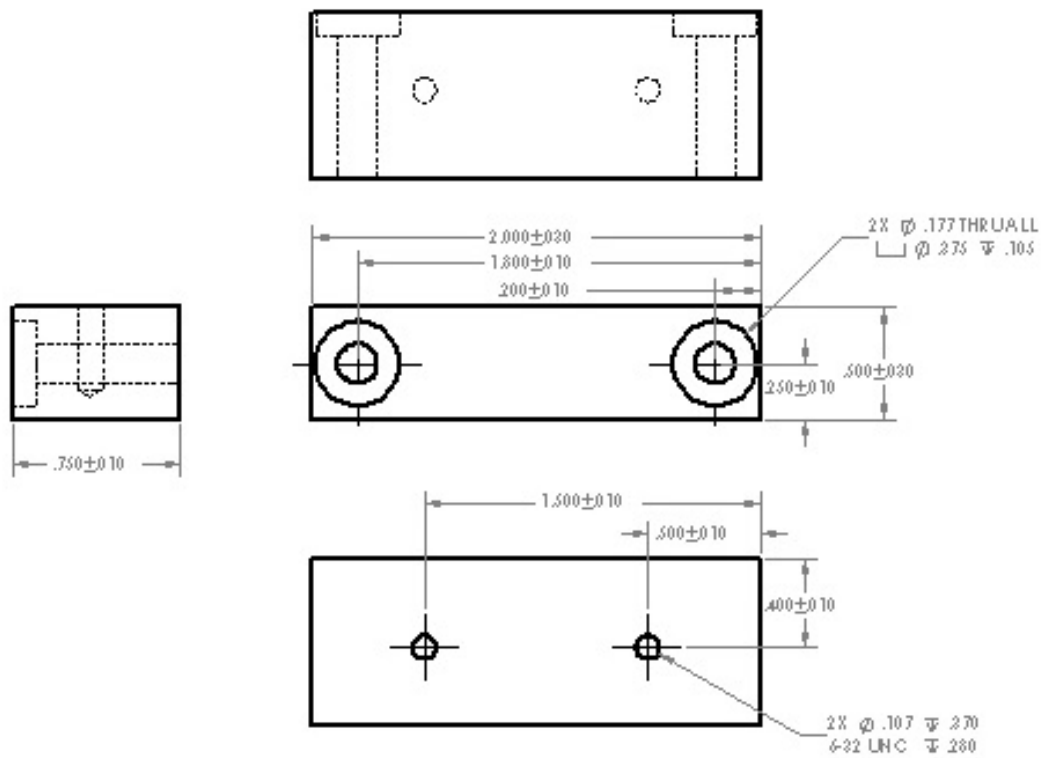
The bottom piece clamping the blade flexure to the O-frame.
